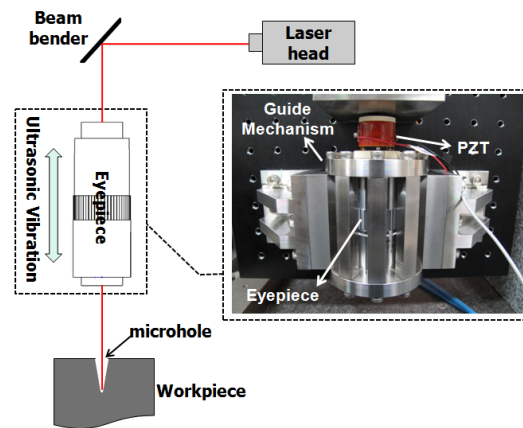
Laser machining with vibrating tool (laser)¹⁵
